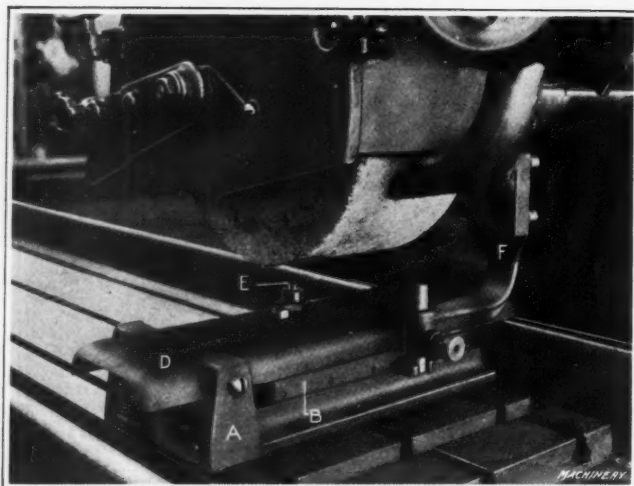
Device for truing Face of Wheel to Irregular Form on Norton Surface Grinding Machine
